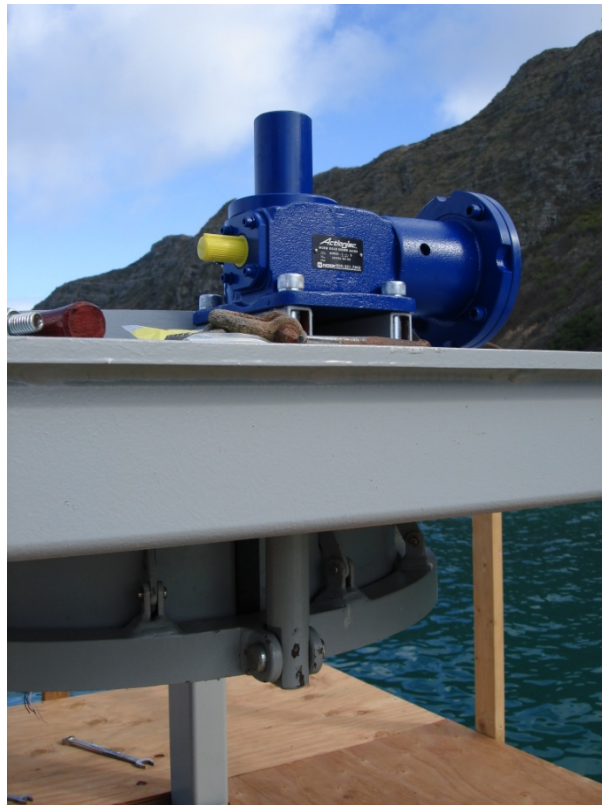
Jack Screw Driving Upper Gripper Engagement Ring.
